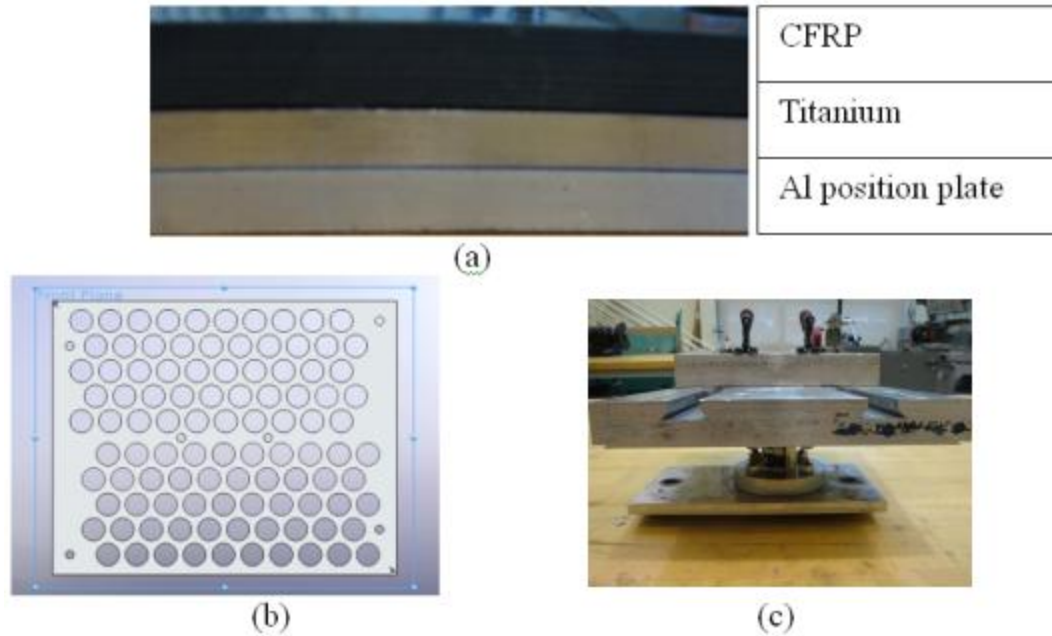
a) CFRP/Ti stack setup with positioning plate b) pre-drilled aluminum positioning plate (Solid Works Design) and c) fixture.
